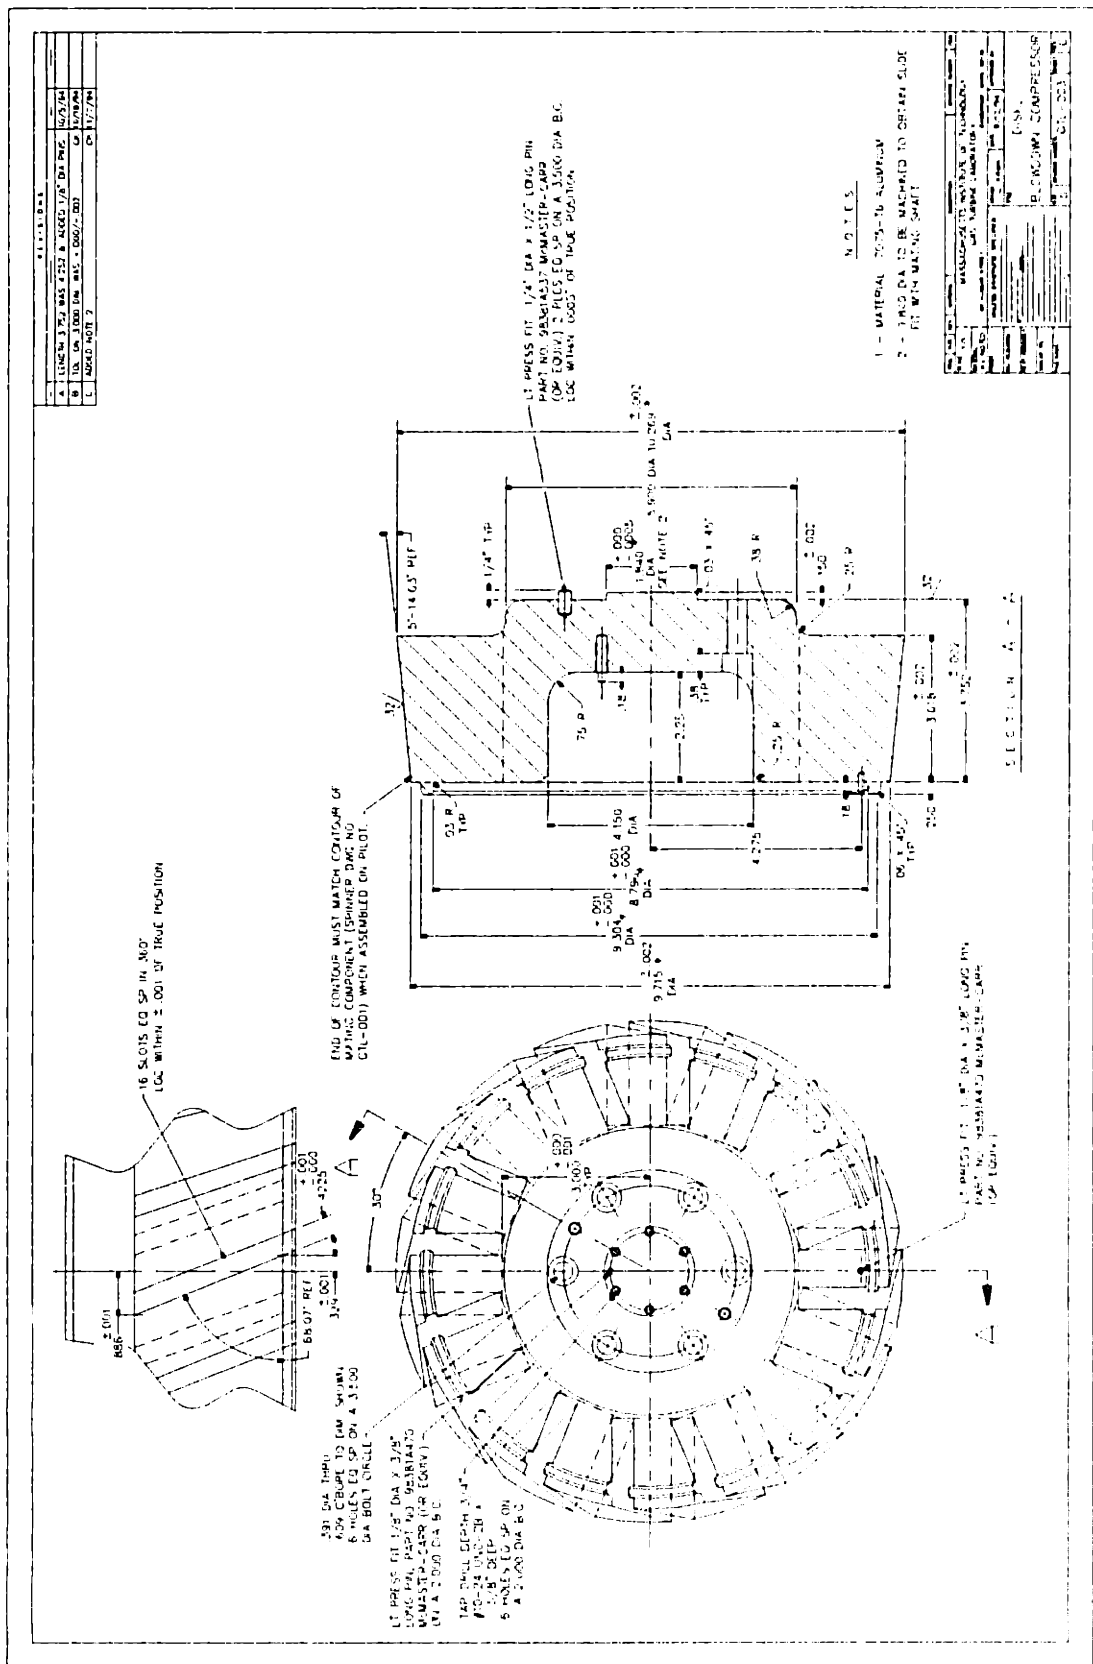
Fan stage drawing (GTL-003): rotor disk (baseline)
